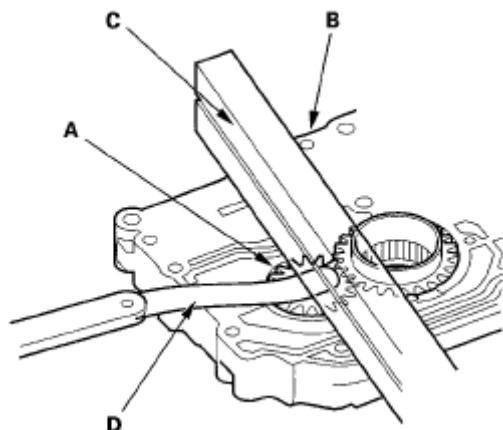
Measuring Thrust Clearance Between ATF Pump Driven Gear And Valve Body
